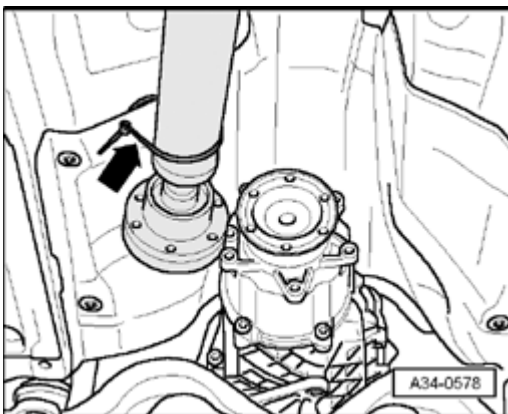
Drive Shaft Tied To Side, Onto Heat Shield
